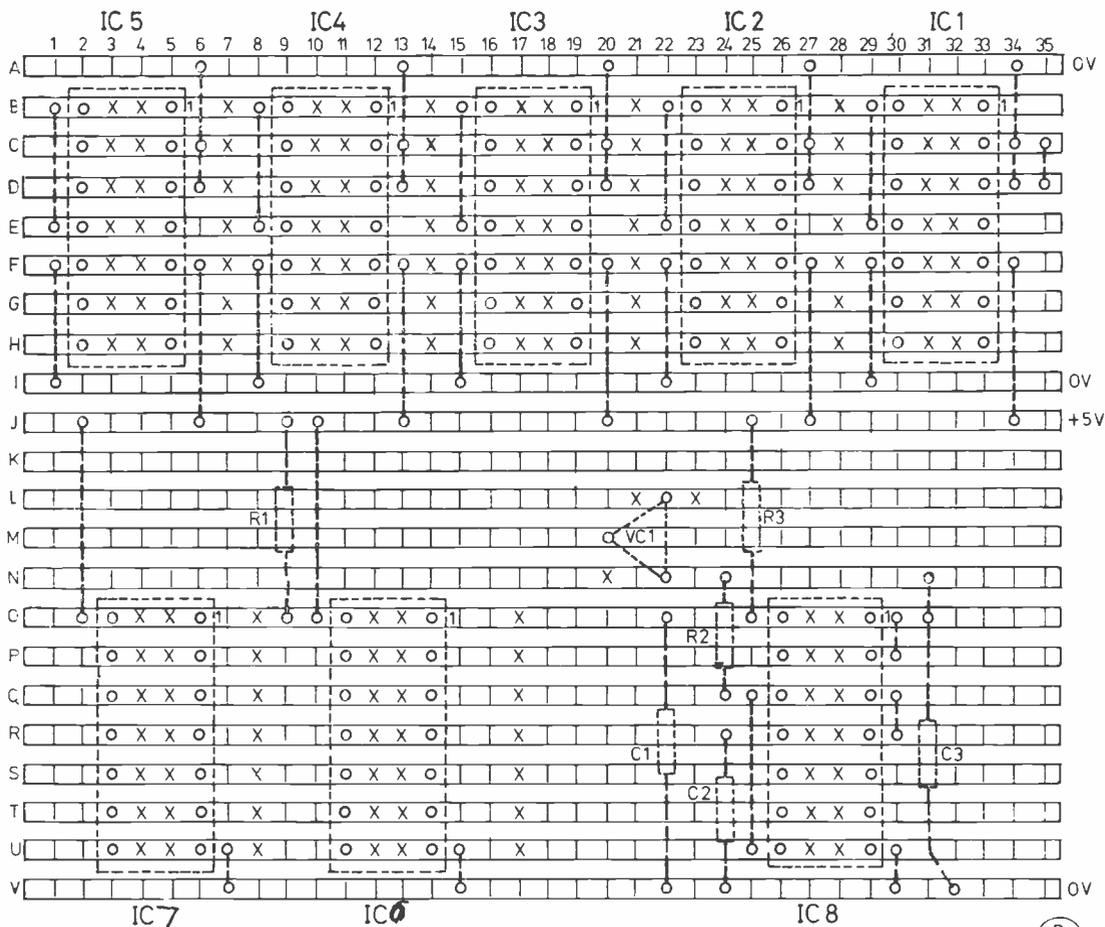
CLOCK BOARD LAYOUT (UNDERSIDE)
